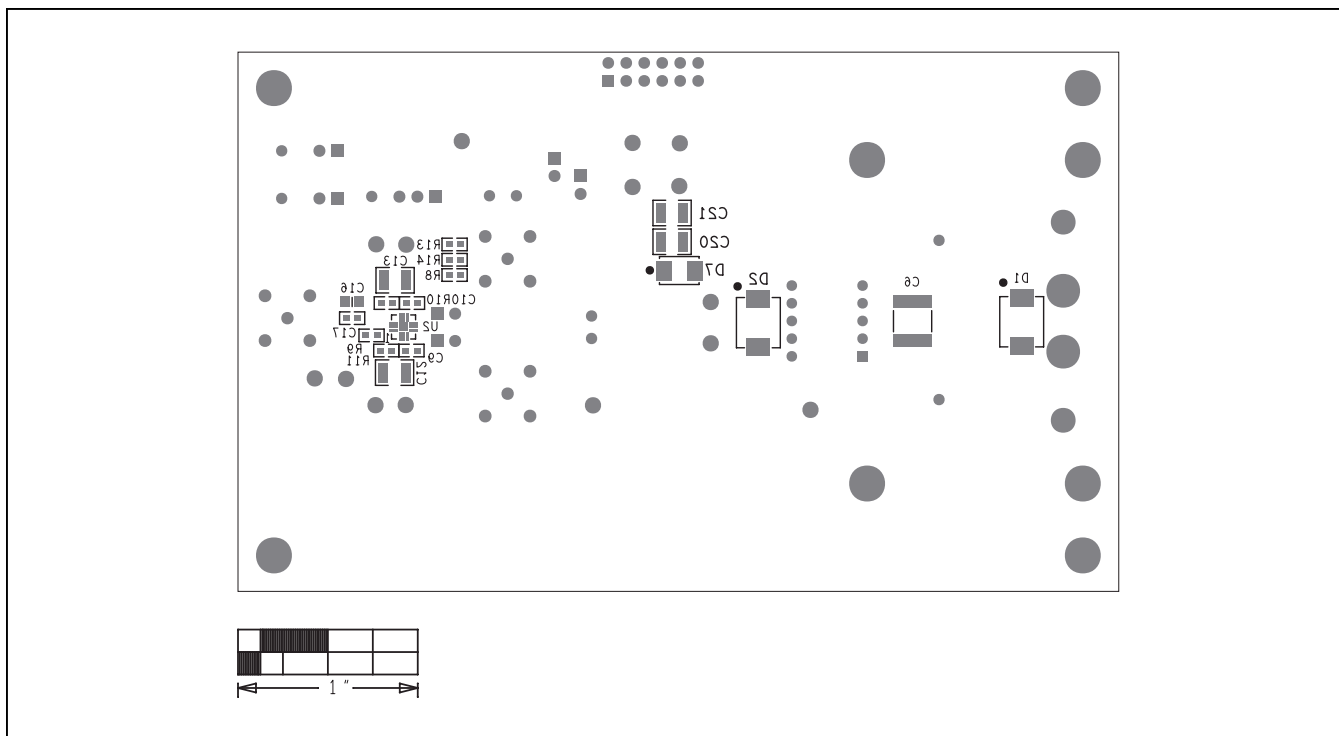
MAX44211 EV Kit Component Placement Guide—Solder Side
